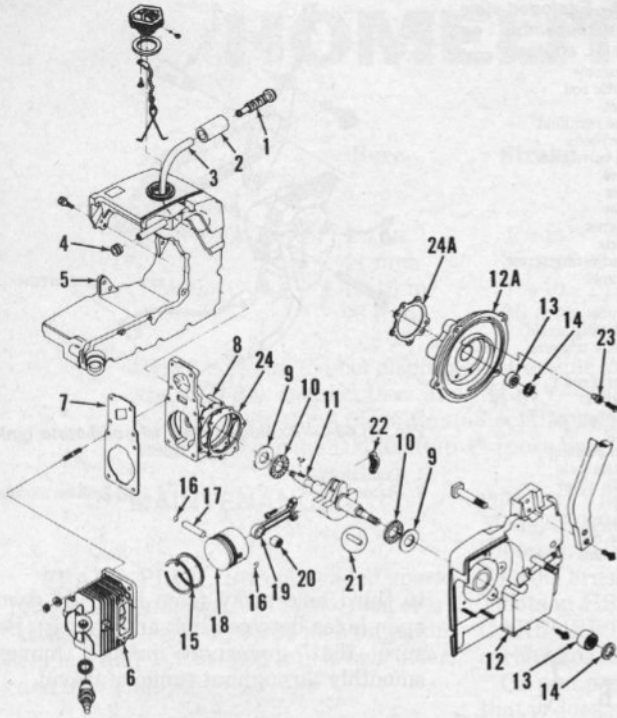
Exploded view of engine. Drivecase (12) is used on saw engines while pump housing (12A) is used on pump engines. Refer to Fig. HL43-5A for brushcutter drivecase.
